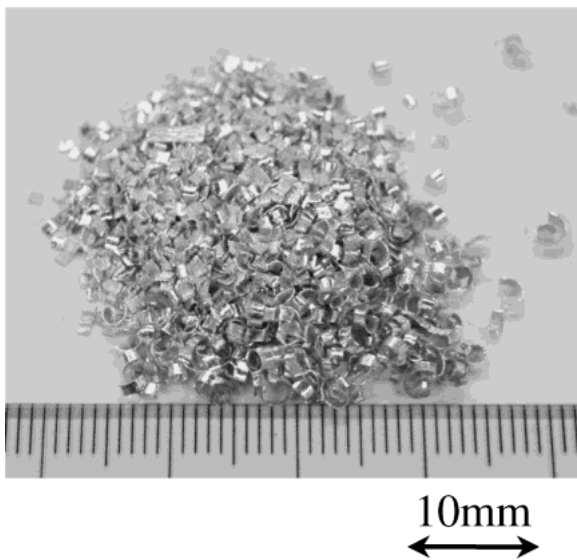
Photograph of machined chips of AZ31 magnesium alloy.
